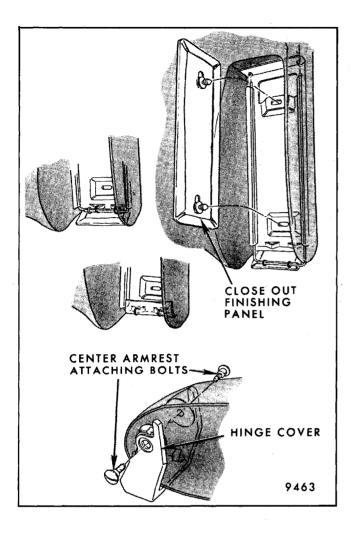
Front Seat Center Armrest and Hinge Support - A, B and C Styles - 50-50 Passenger and Driver's Seat
